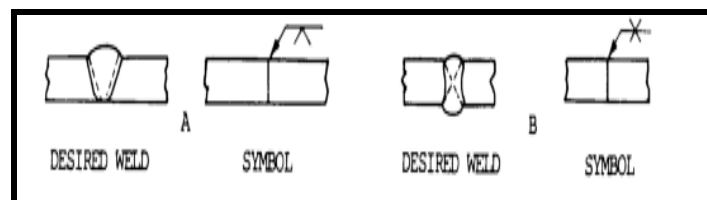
Groove weld for welds extending through the members to be joined.
